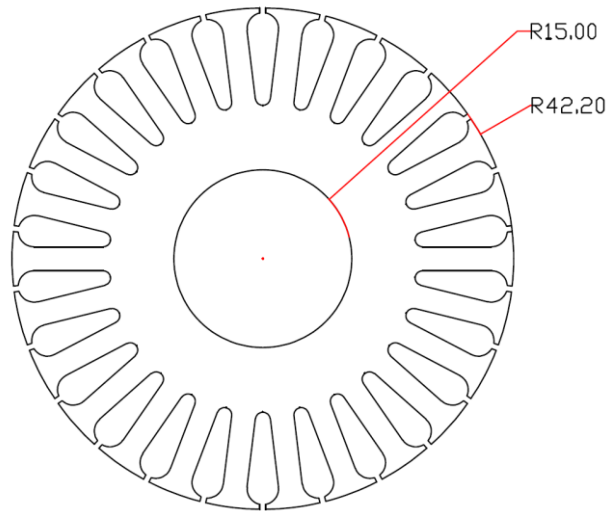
Rotor lamination dimensions of the prototype machine.
